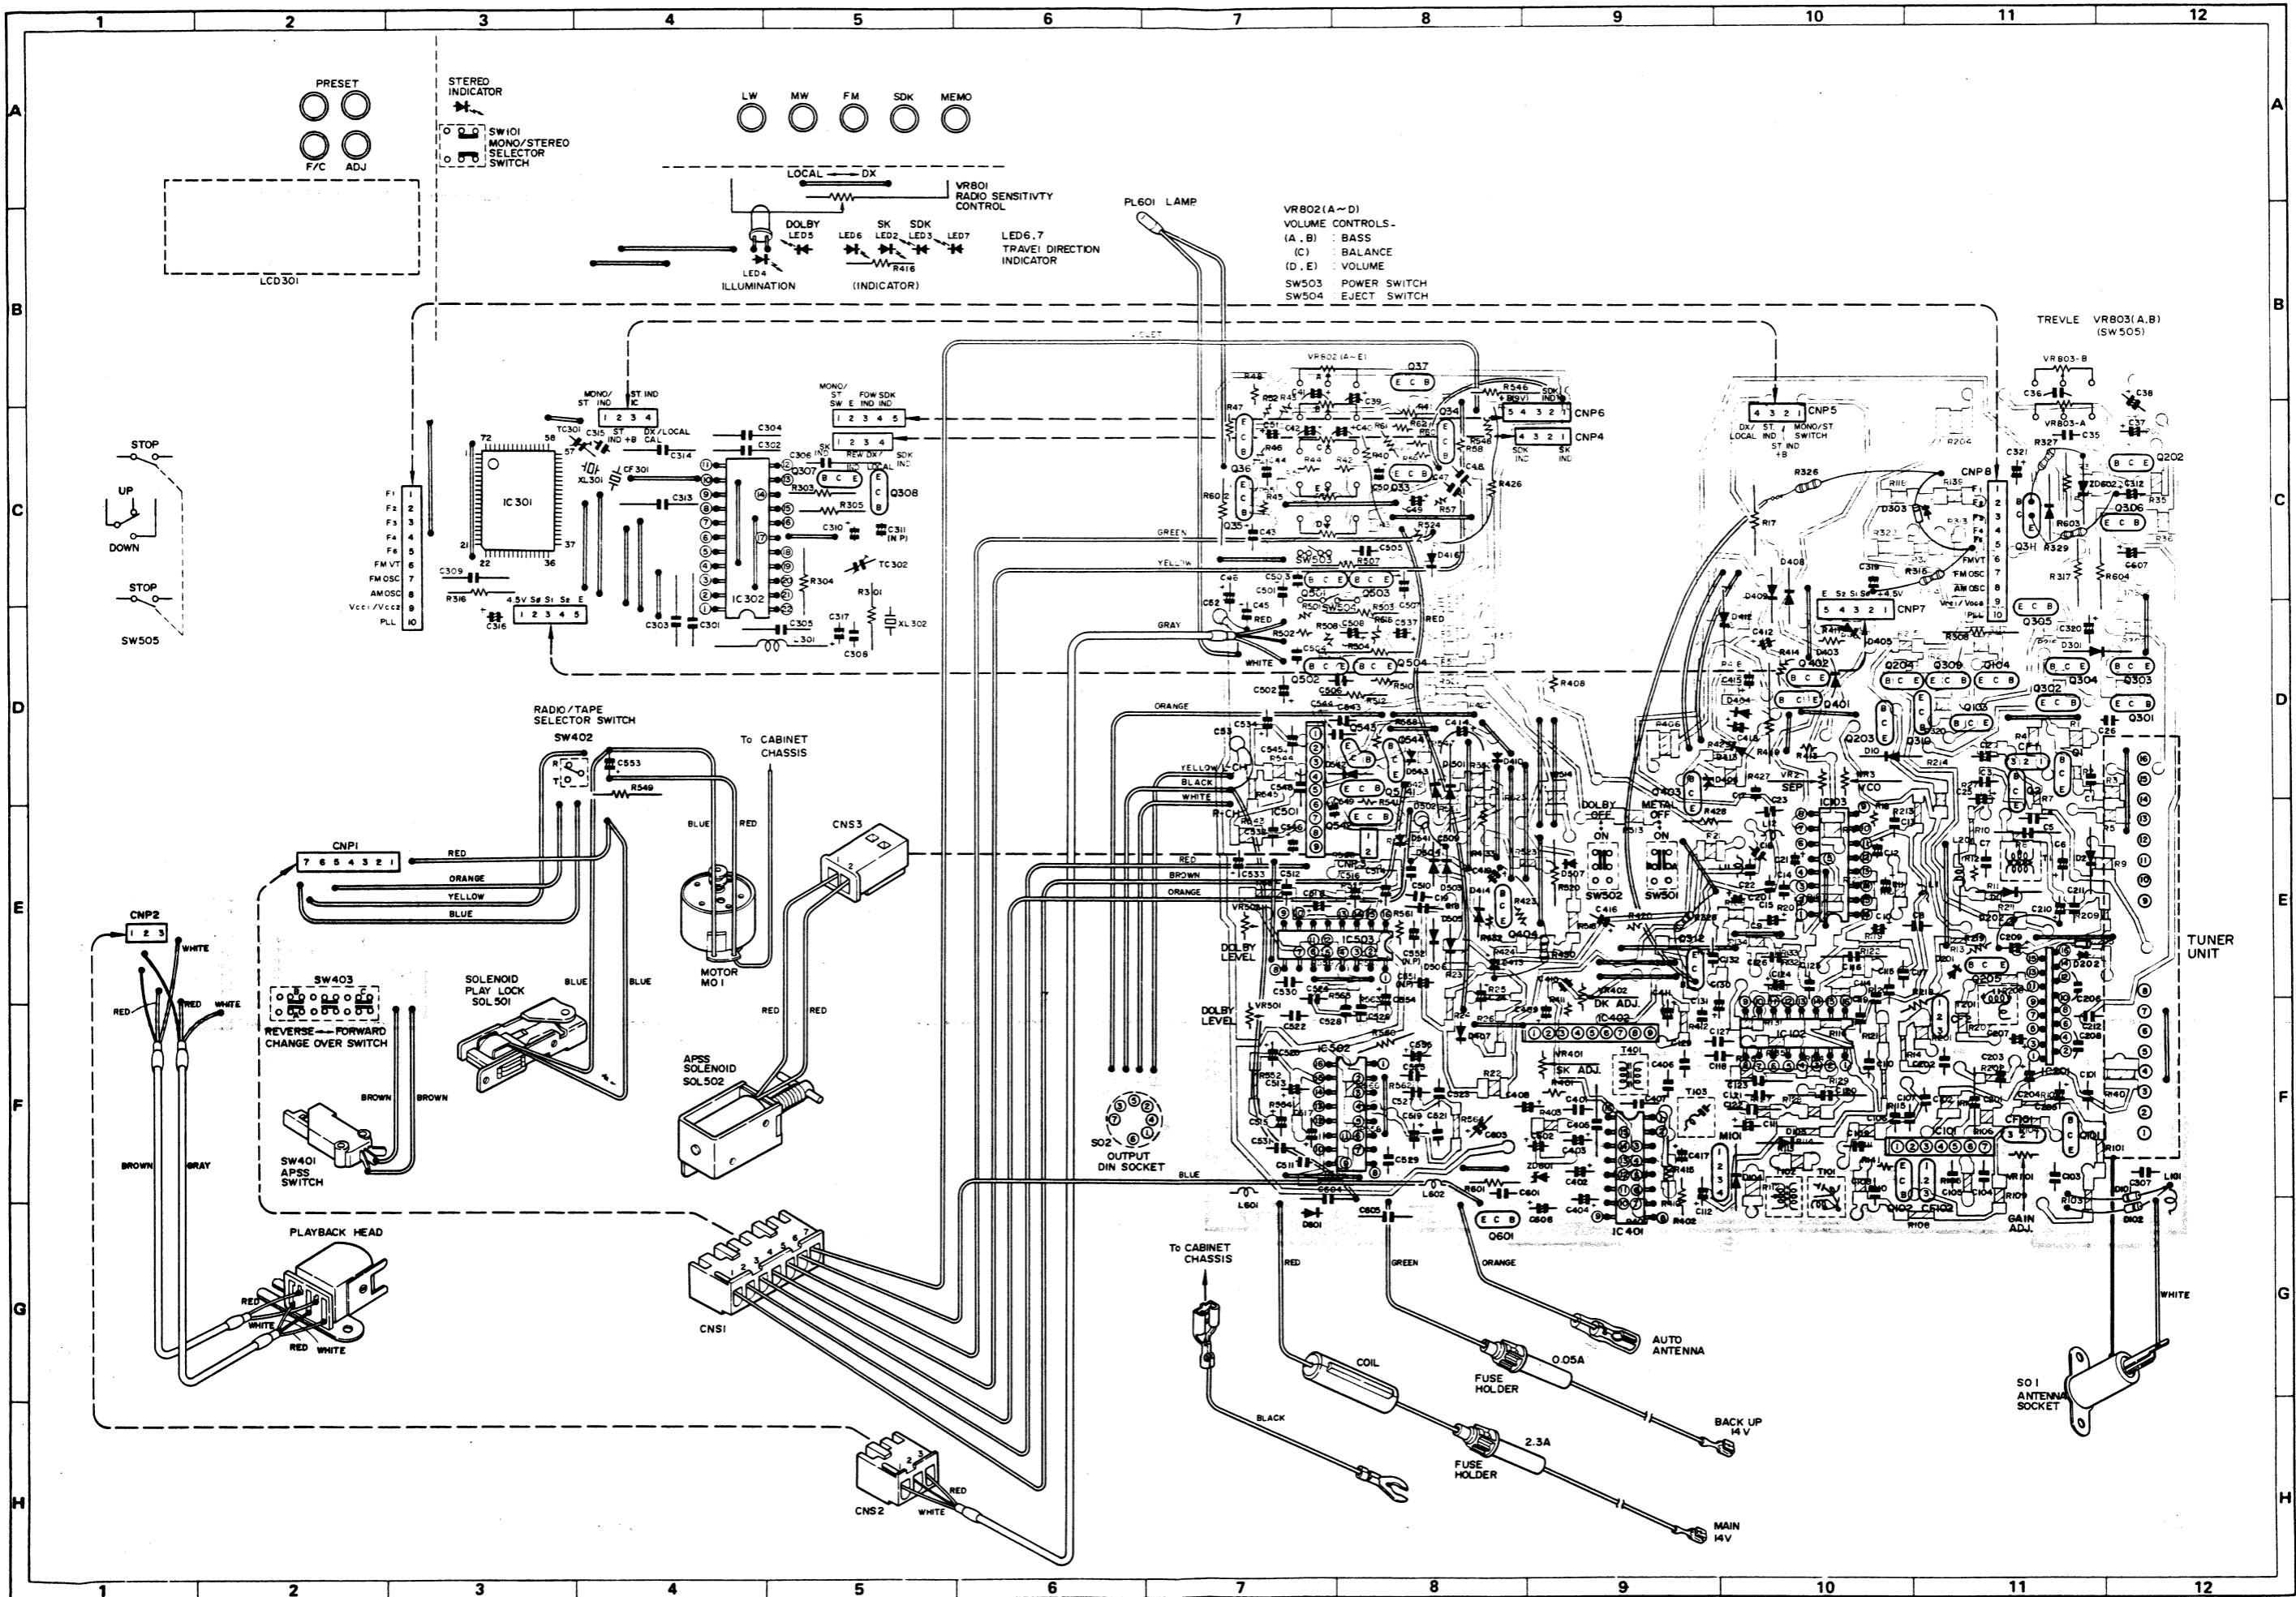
WIRING SIDE OF P.W. BOARD (RG-7550H)
